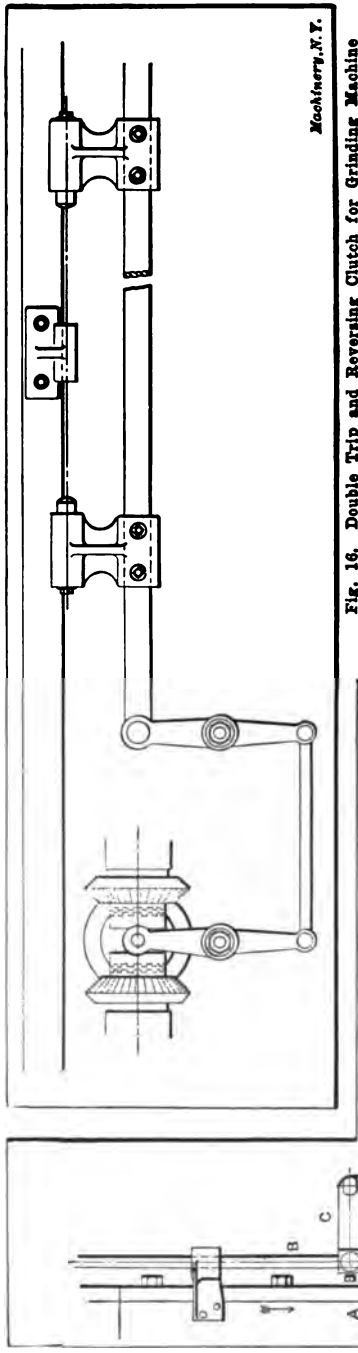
Double Trip and Reversing Clutch for Grinding Machine
